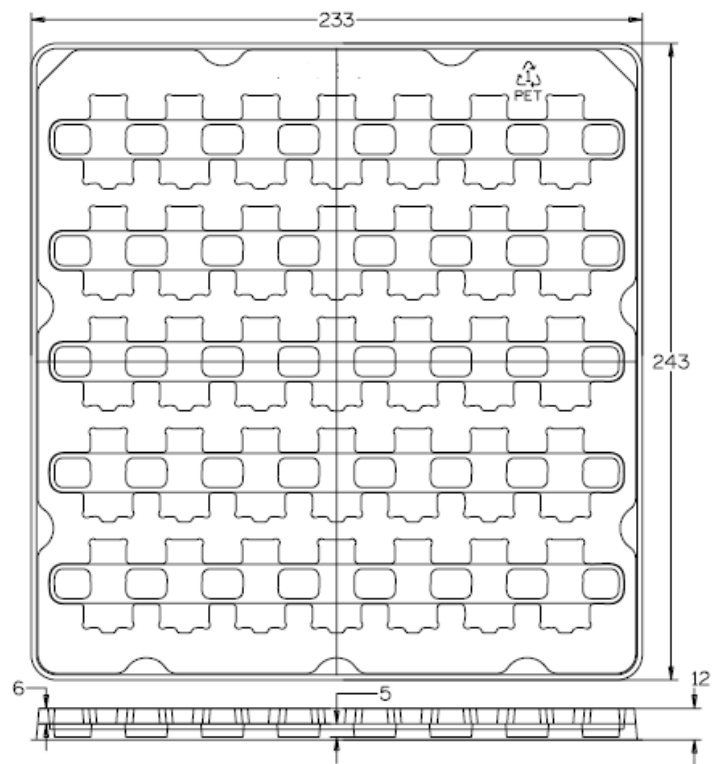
Package ray dimensions for LUXEON S3000 LXSx-Pxxx-0024(N).
